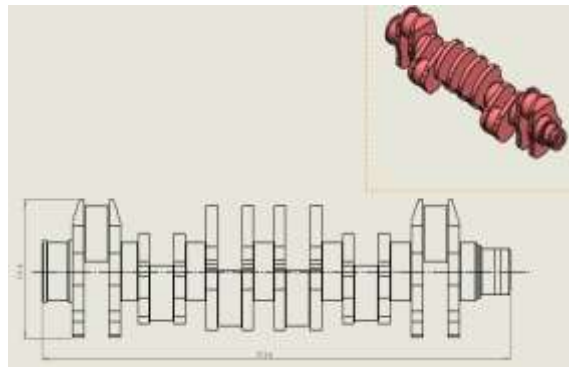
Component view (crank shaft for 6 cylinder engine)
